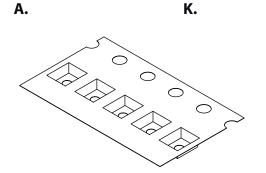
SMD Tape Packing (Dimensions for actual tape carrier may vary slightly)
